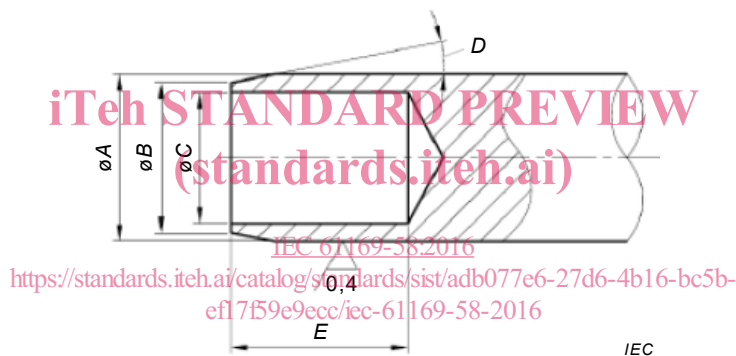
Gauge pin for outer contact (for dimensions, see Table 4)
